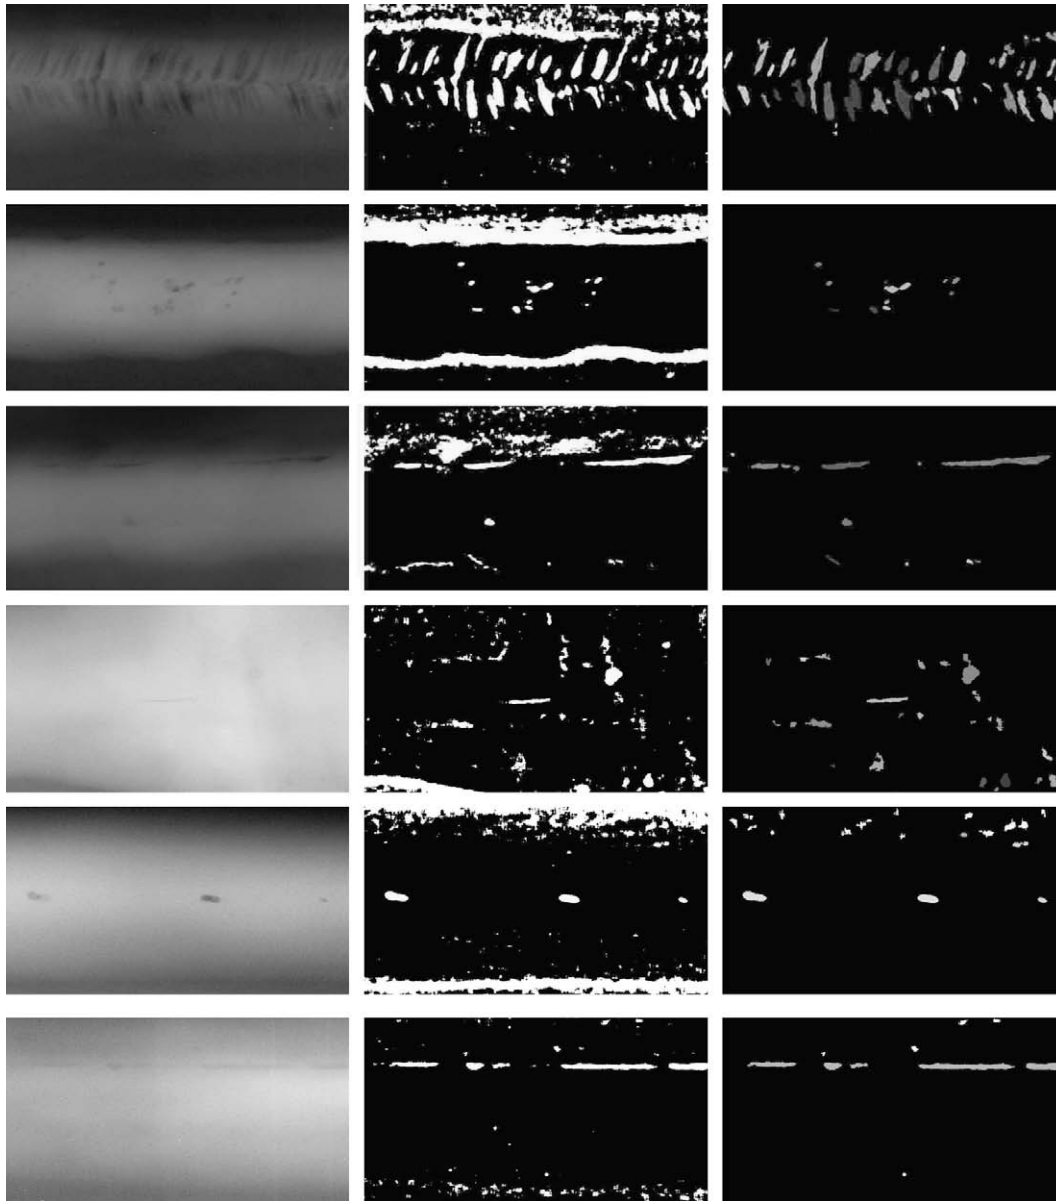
Original, thresholded and segmented image for welds that contain: 1st row: worm holes (defects almost vertical to the weld), 2nd row: porosity (circle spots over the whole area), 3rd row: linear slag inclusion (linear defects at the top), 4th row: crack (linear in the middle), 5th row: gas pores (ovals in middle), and 6th row: lack of fusion (linear at the top).
